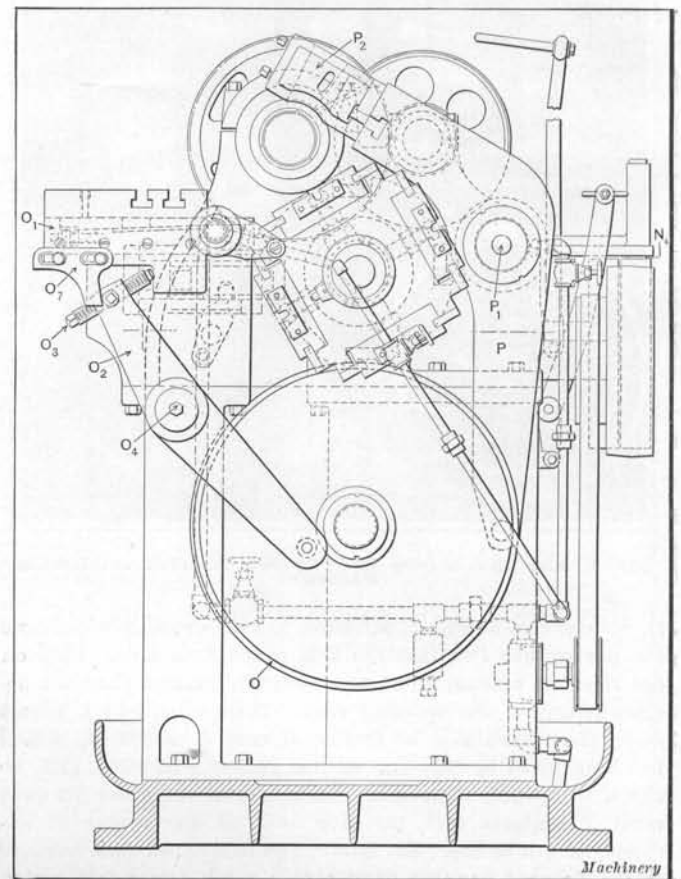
Diagram illustrating Method of operating Forming Slide and Cutting-off Arm, also showing Construction of Turret and Turret Slide
